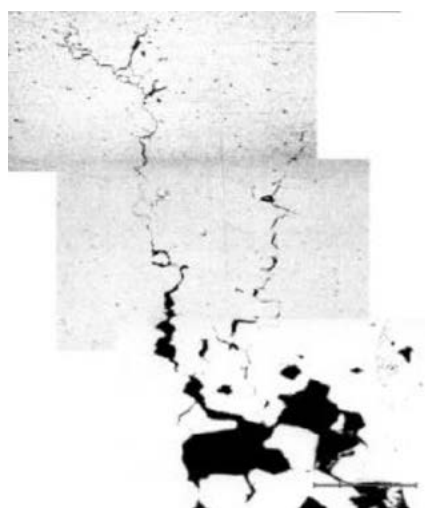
Liquid metal embrittlement – Cu in the HAZ of repair weld
